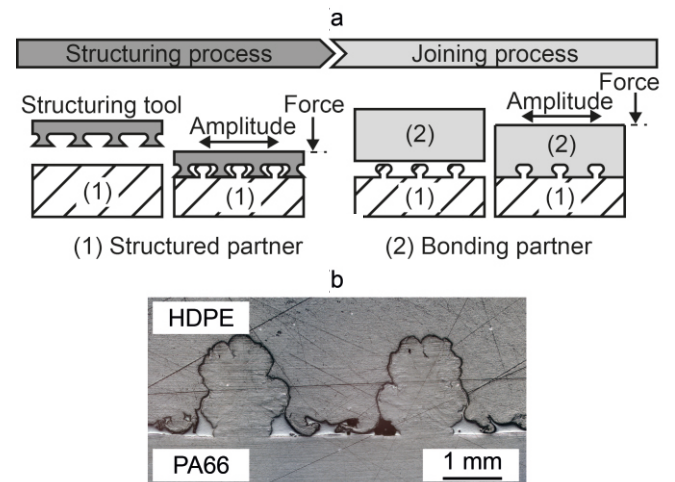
Incompatible multi-material combination based on form-fit by using the vibration welding technology
